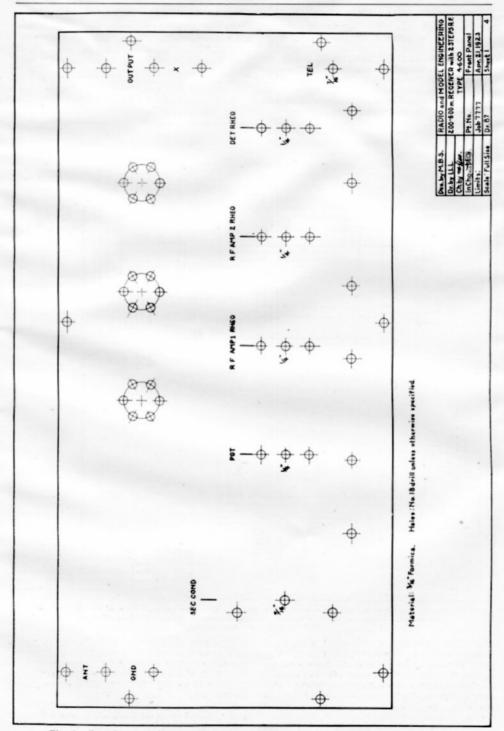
Exactly one-half size. The layout of the front panel. Since a standard size, 7 x 14 ins., is used, you can get a stock cabinet to fit it
